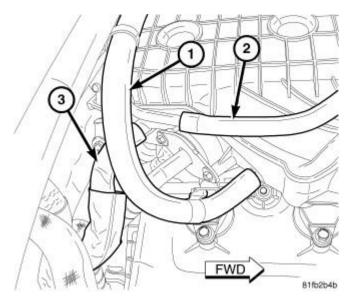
EGR Tube, PCV & Power Brake Booster Vacuum Hoses Courtesy of CHRYSLER LLC
